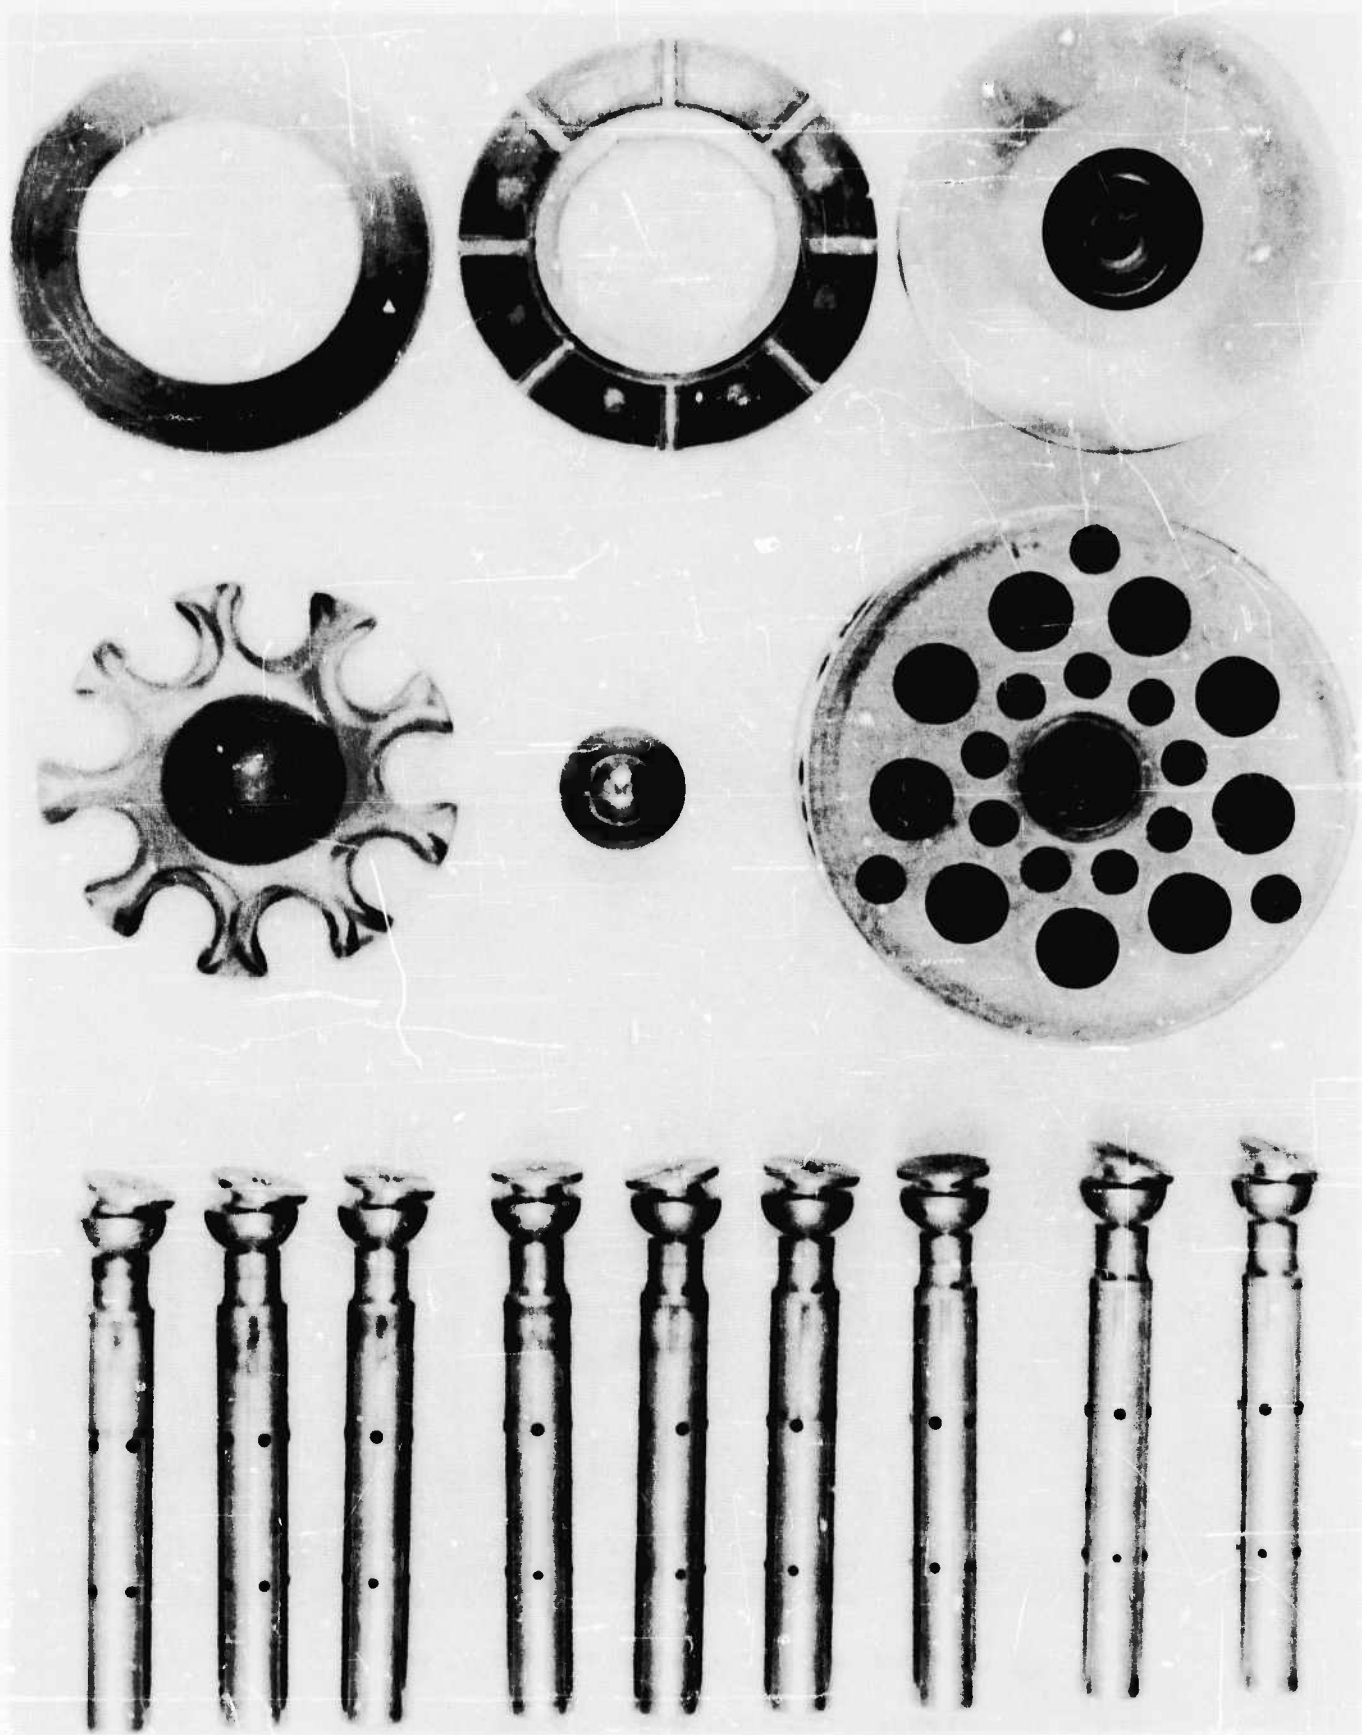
PUMP PARTS AFTER TEST NY-11
